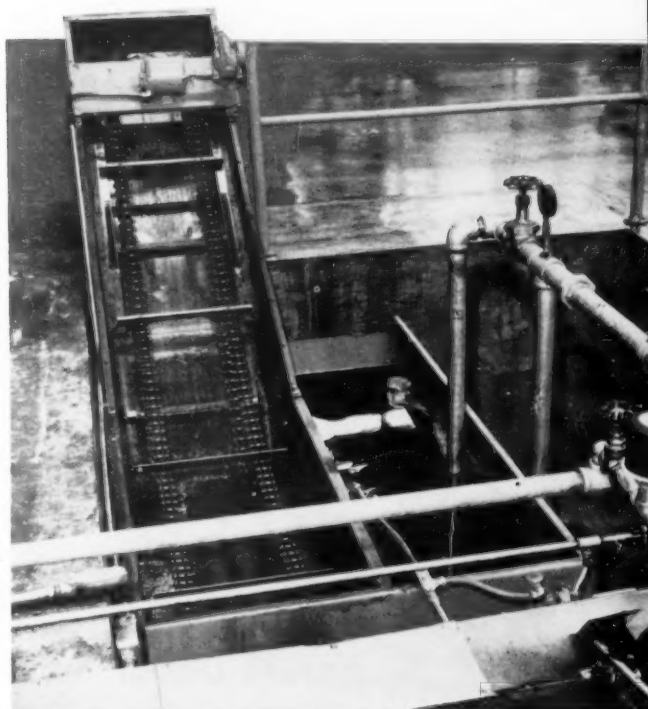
Filter in pit with drag-out ramp and chain-driven flights for removal of metal fines. Tote box is on far side of conveyor ramp. Spent coolant trough from machine is shown in the foreground entering covered main coolant trough for return to filter. Clean coolant line and individual machine line with solenoid valve for automatic machine flow control are visible above trough. Right side of filter shows clean coolant reservoir.
